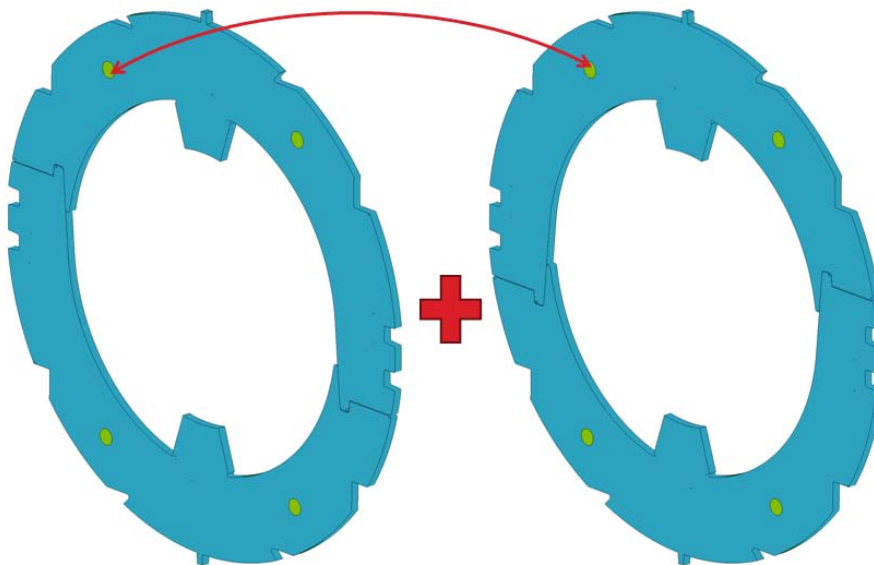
Collars are assembled in alternate position and kept together through stainless steel pins.
